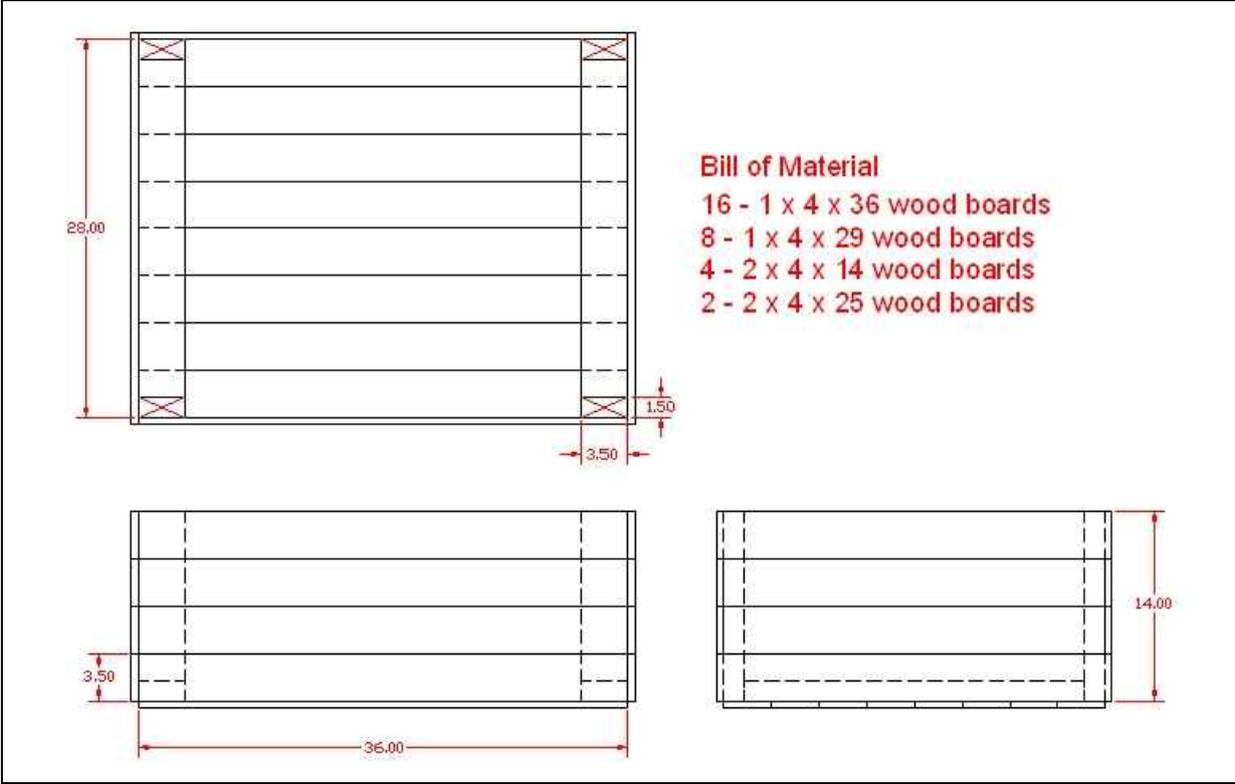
The Dimensions of the Sliding Wooden Crate
